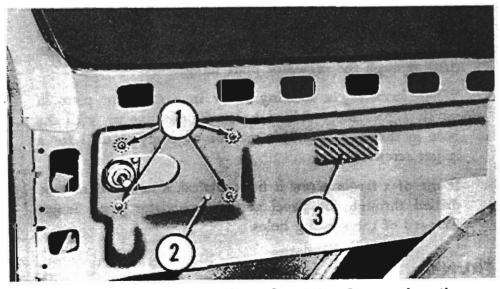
Remove the Regulator Retaining Screws, Locating Screw and Slide the Pivot Arm Out of the Bracket.
